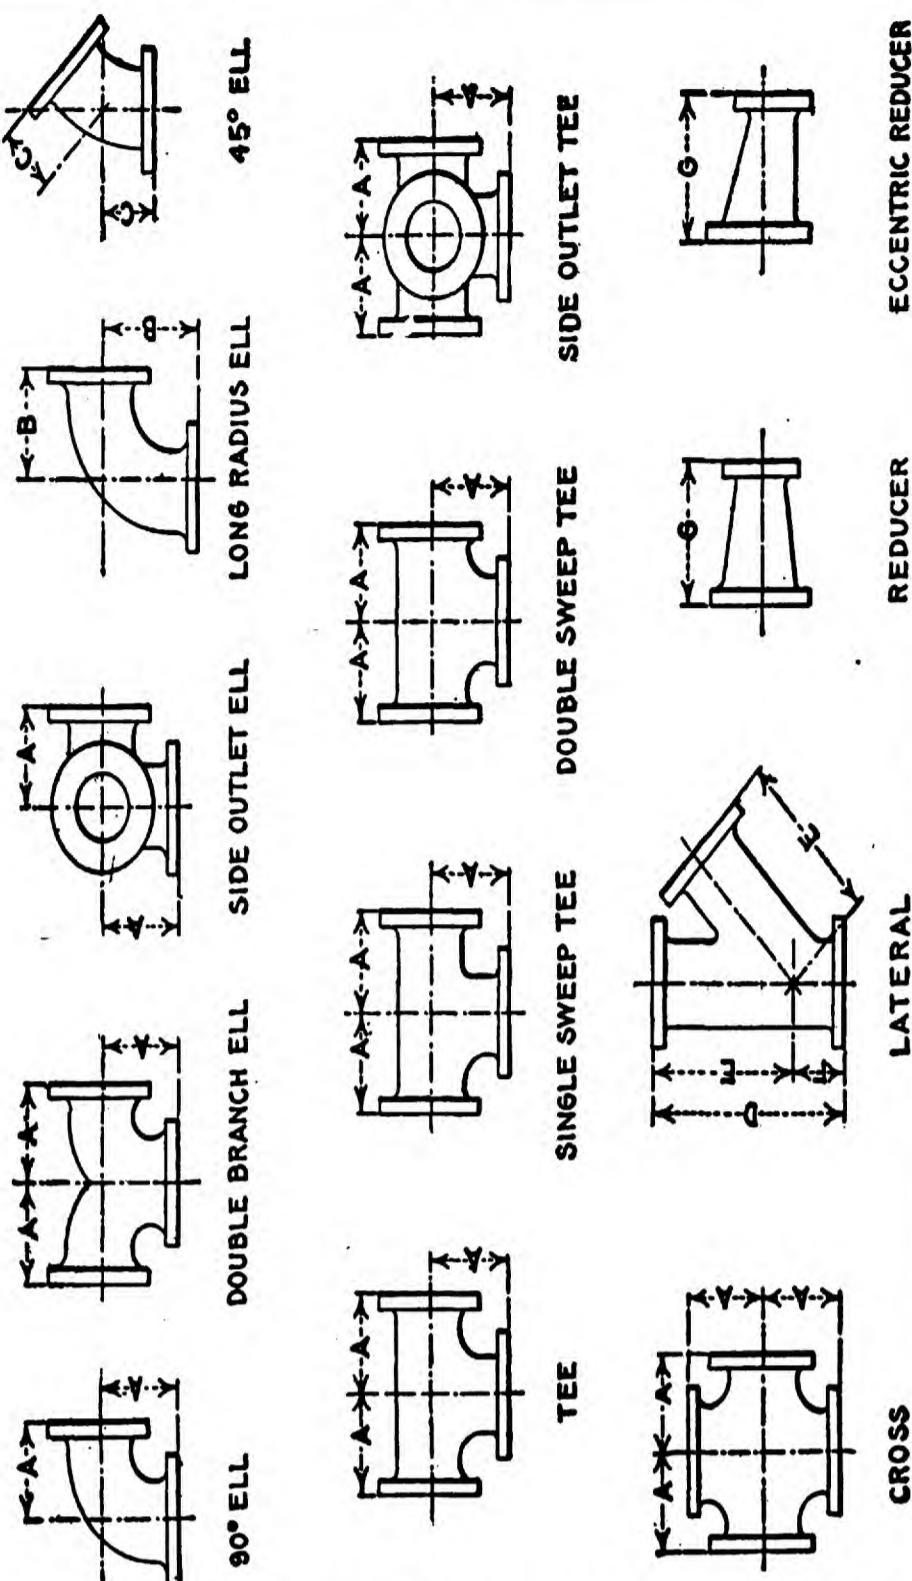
Standard Types of Flange Fittings Dimensioned in Tables 15 and 16.
